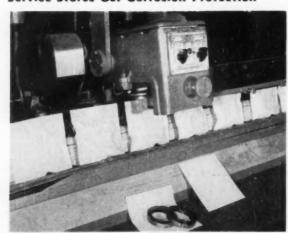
Oil seals are coated with a light oil-type slushing compound and enclosed in heat sealable polyethylene-coated kraft bags. Sealing is done by this machine
